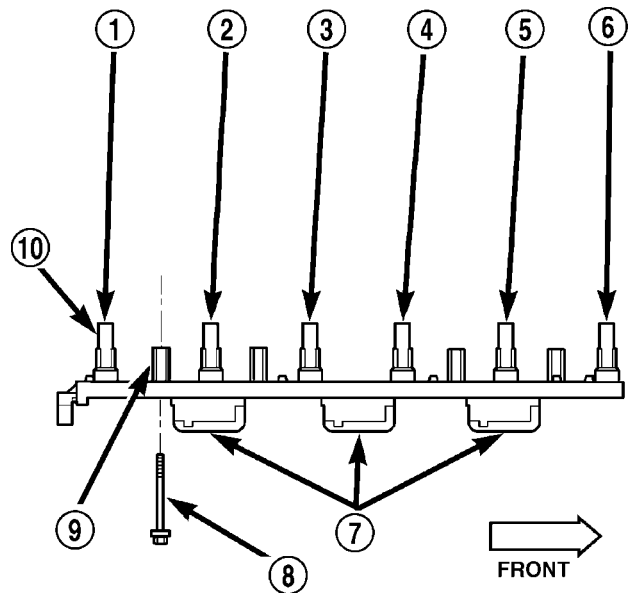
Ignition Coil Assembly—4.0L 6-Cylinder Engine
